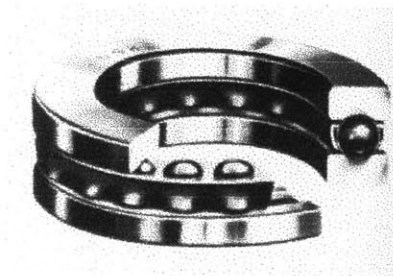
Thrust ball bearings. Source: NSK-RHP
